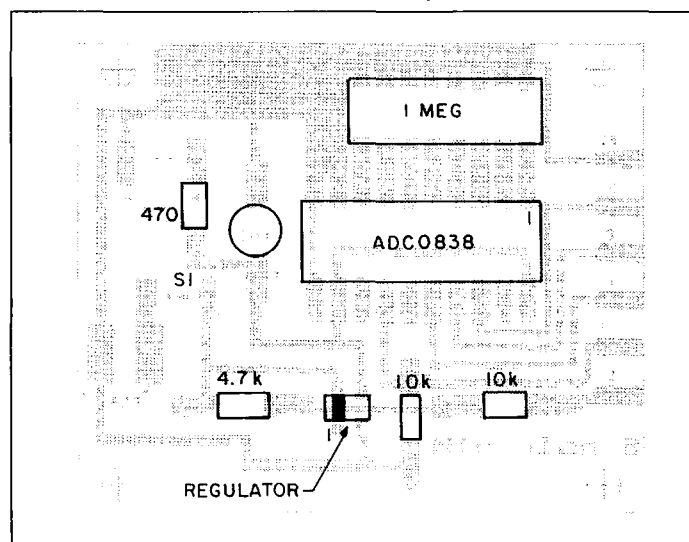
Parts placement. Note that all components mount on the foil side of the PC board.
